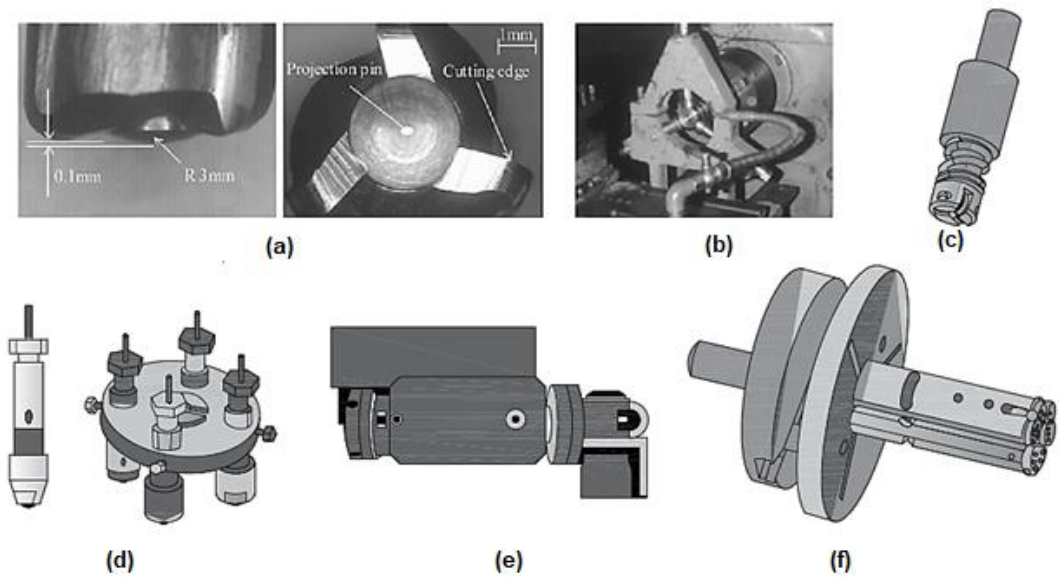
Special burnishing tool configurations. (a) Milling & burnishing tool [65], (b) Center rest multi-ball tool [66], (c) Multi-roller tool [67], (d) Multi-ball tool [65], (e) Adjustable roller tool [68], (f) Multi-ball tool [69]
